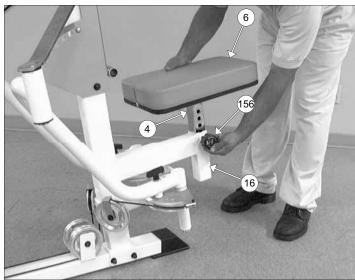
Attach the assembled Bench Press Adjustable Seat Frame (#4) to the Front Upright (#16).
